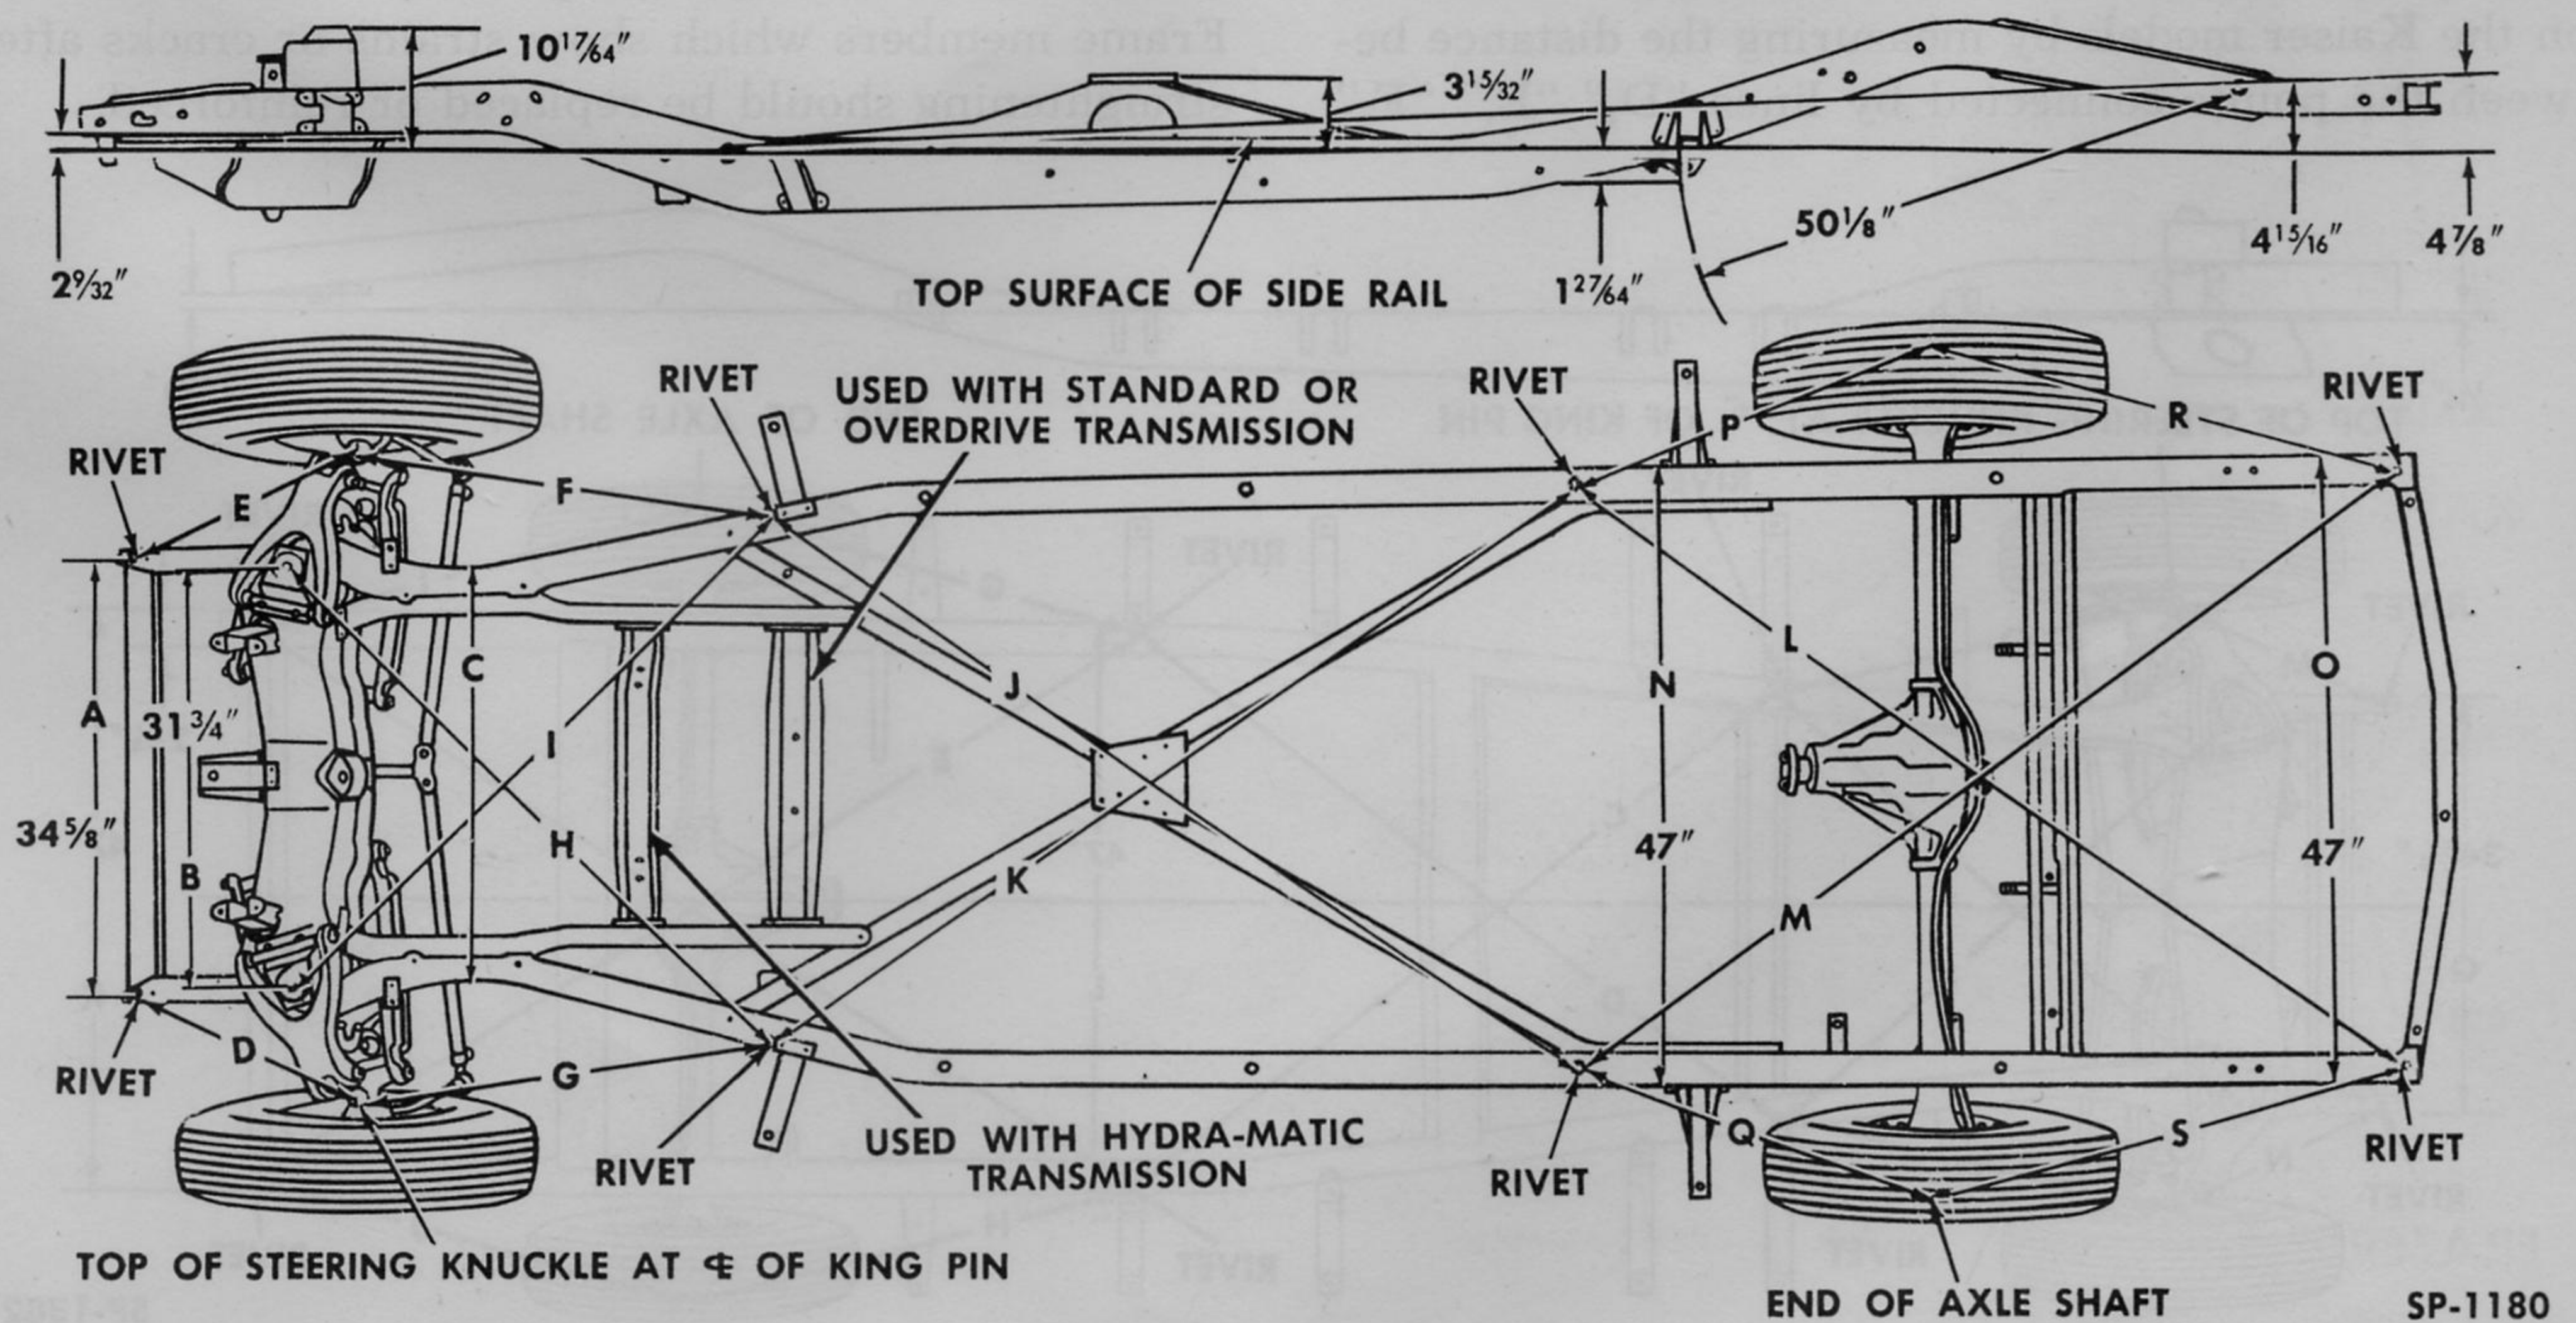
Typical Frame, Front Suspension and Rear Axle Alignment Diagram—Kaiser
